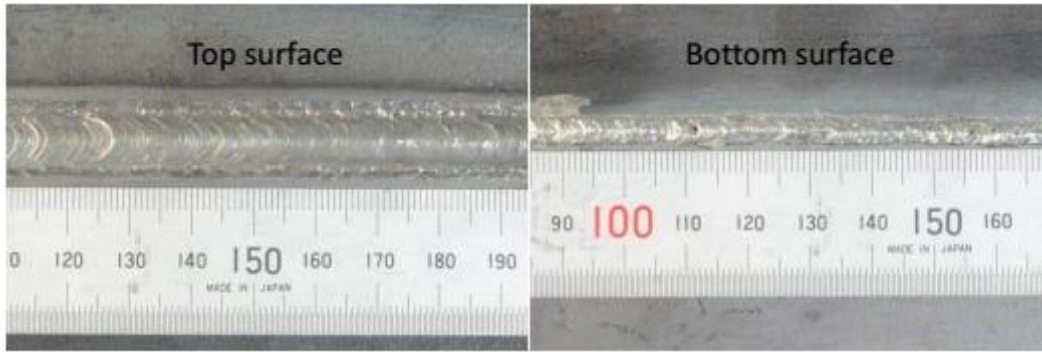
The bead appearance of Plasma-MIG hybrid welding
